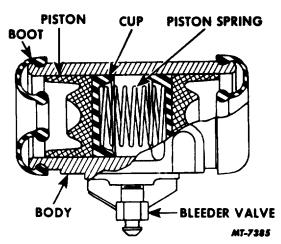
Typical Double Piston Wheel Cylinder (Cross Sectional View)
